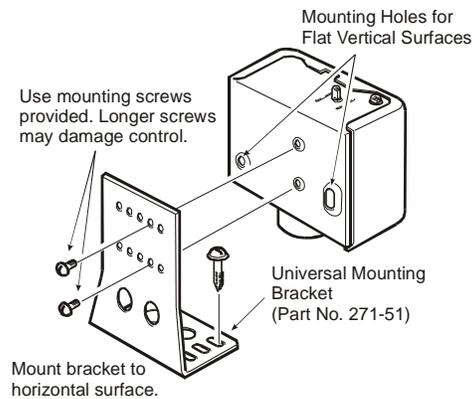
Mounting the P70, P72, and P170 Pressure Controls with NEMA 1 Enclosures, in. (mm)
